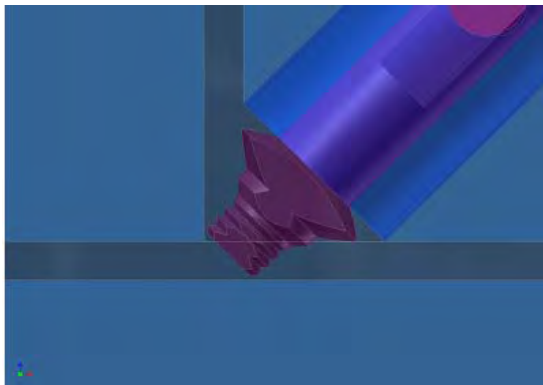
FSW-Tool concept newly developed at HZG for welding of fillet joints
